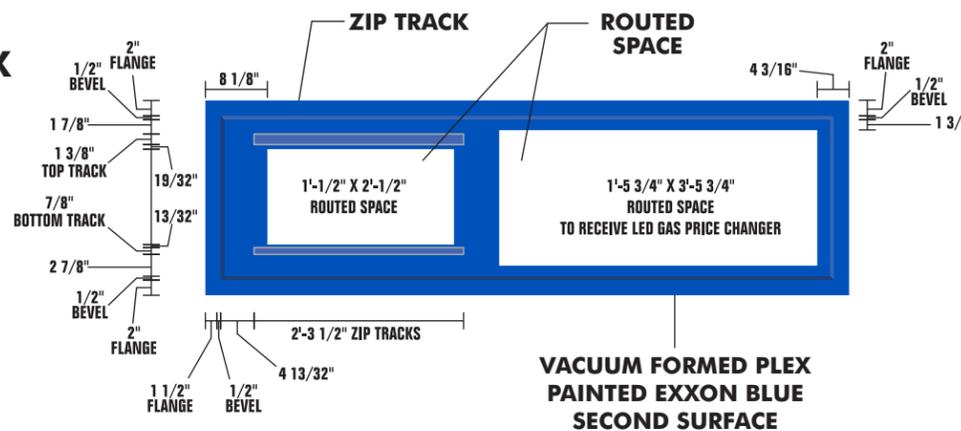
DETAIL - TYPICAL VACUUM-FORMED PLEX WITH GAS PRICE CHANGER AND REMOVABLE ZIP PANEL
